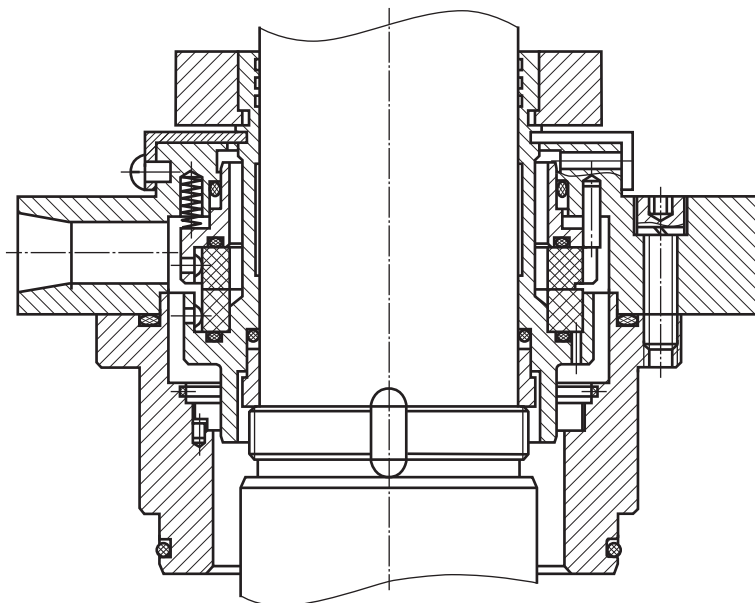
Double mechanical seal brand 2TM 75-130
